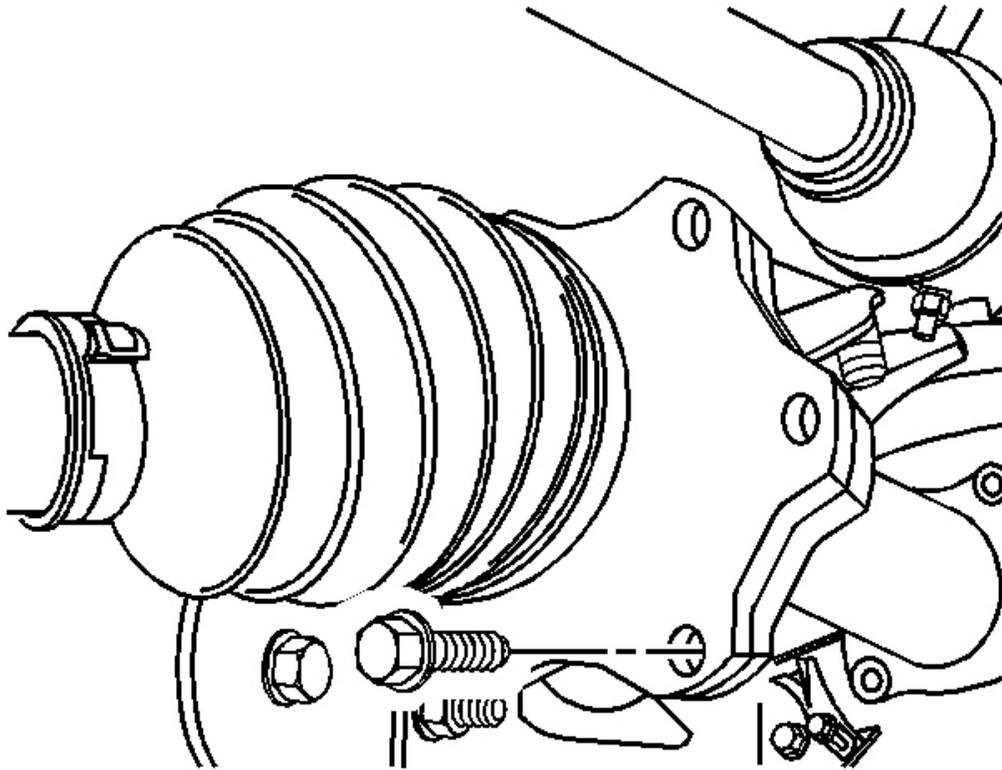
Wheel Drive Shaft Inboard Flange Bolt - Front Drive Axle
